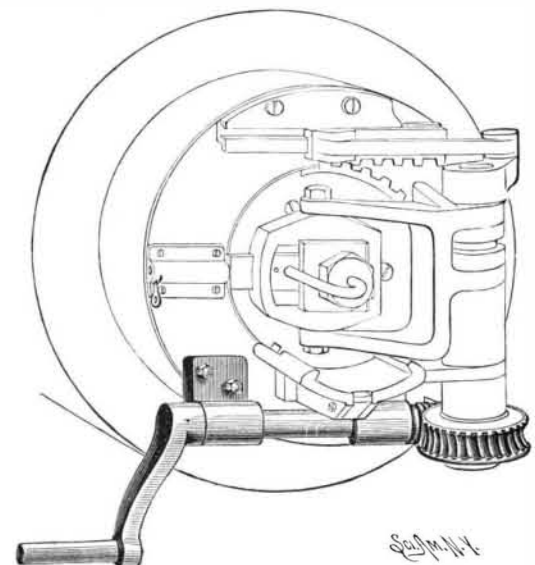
GEARING USED ON GUNS OF LARGE CALIBER TO WORK MECHANISM.
